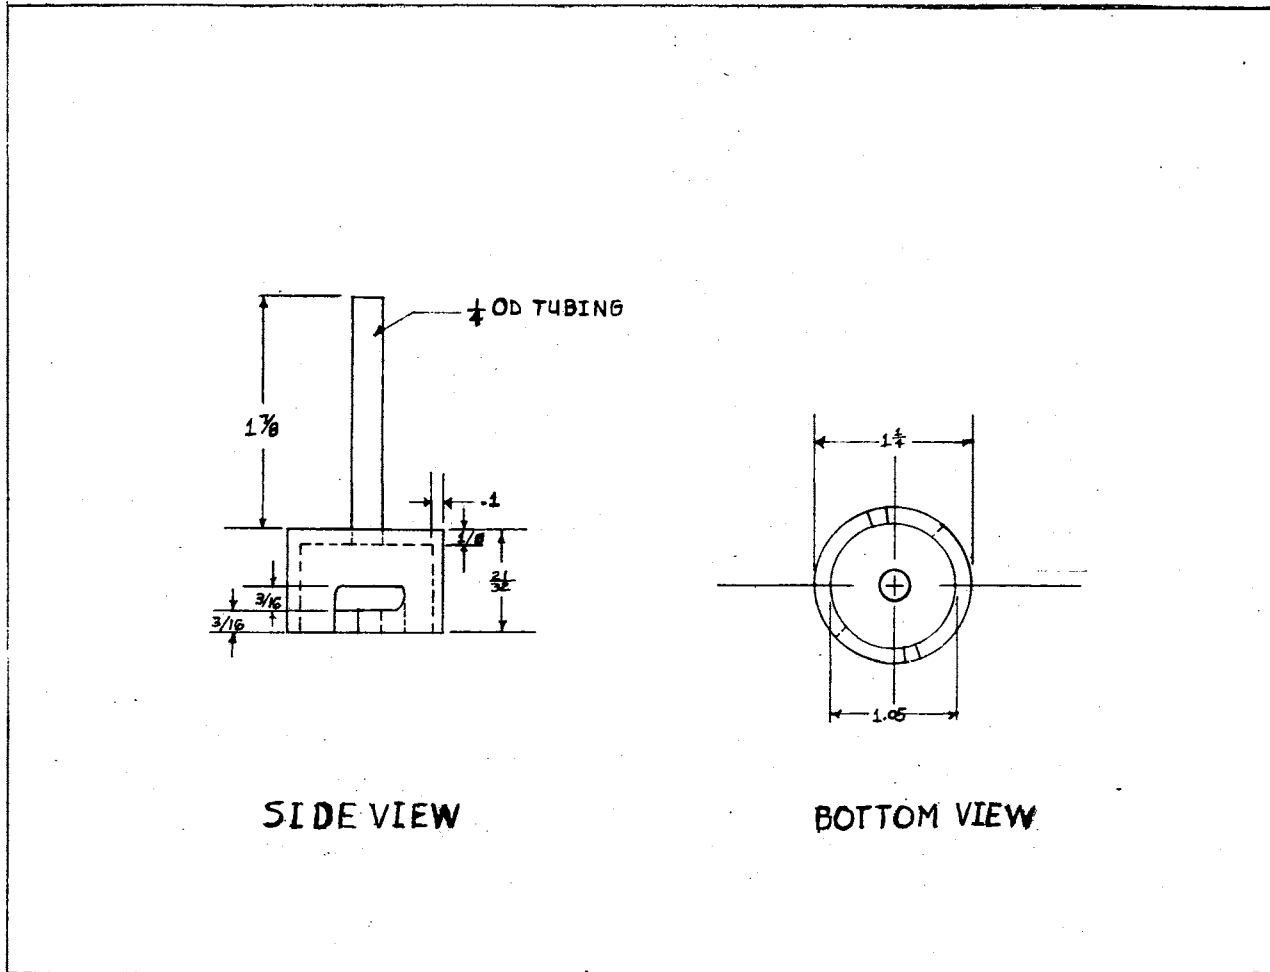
Detailed Dimensioned Drawing of the 25 ml Evaporative Dosimeter Cap
